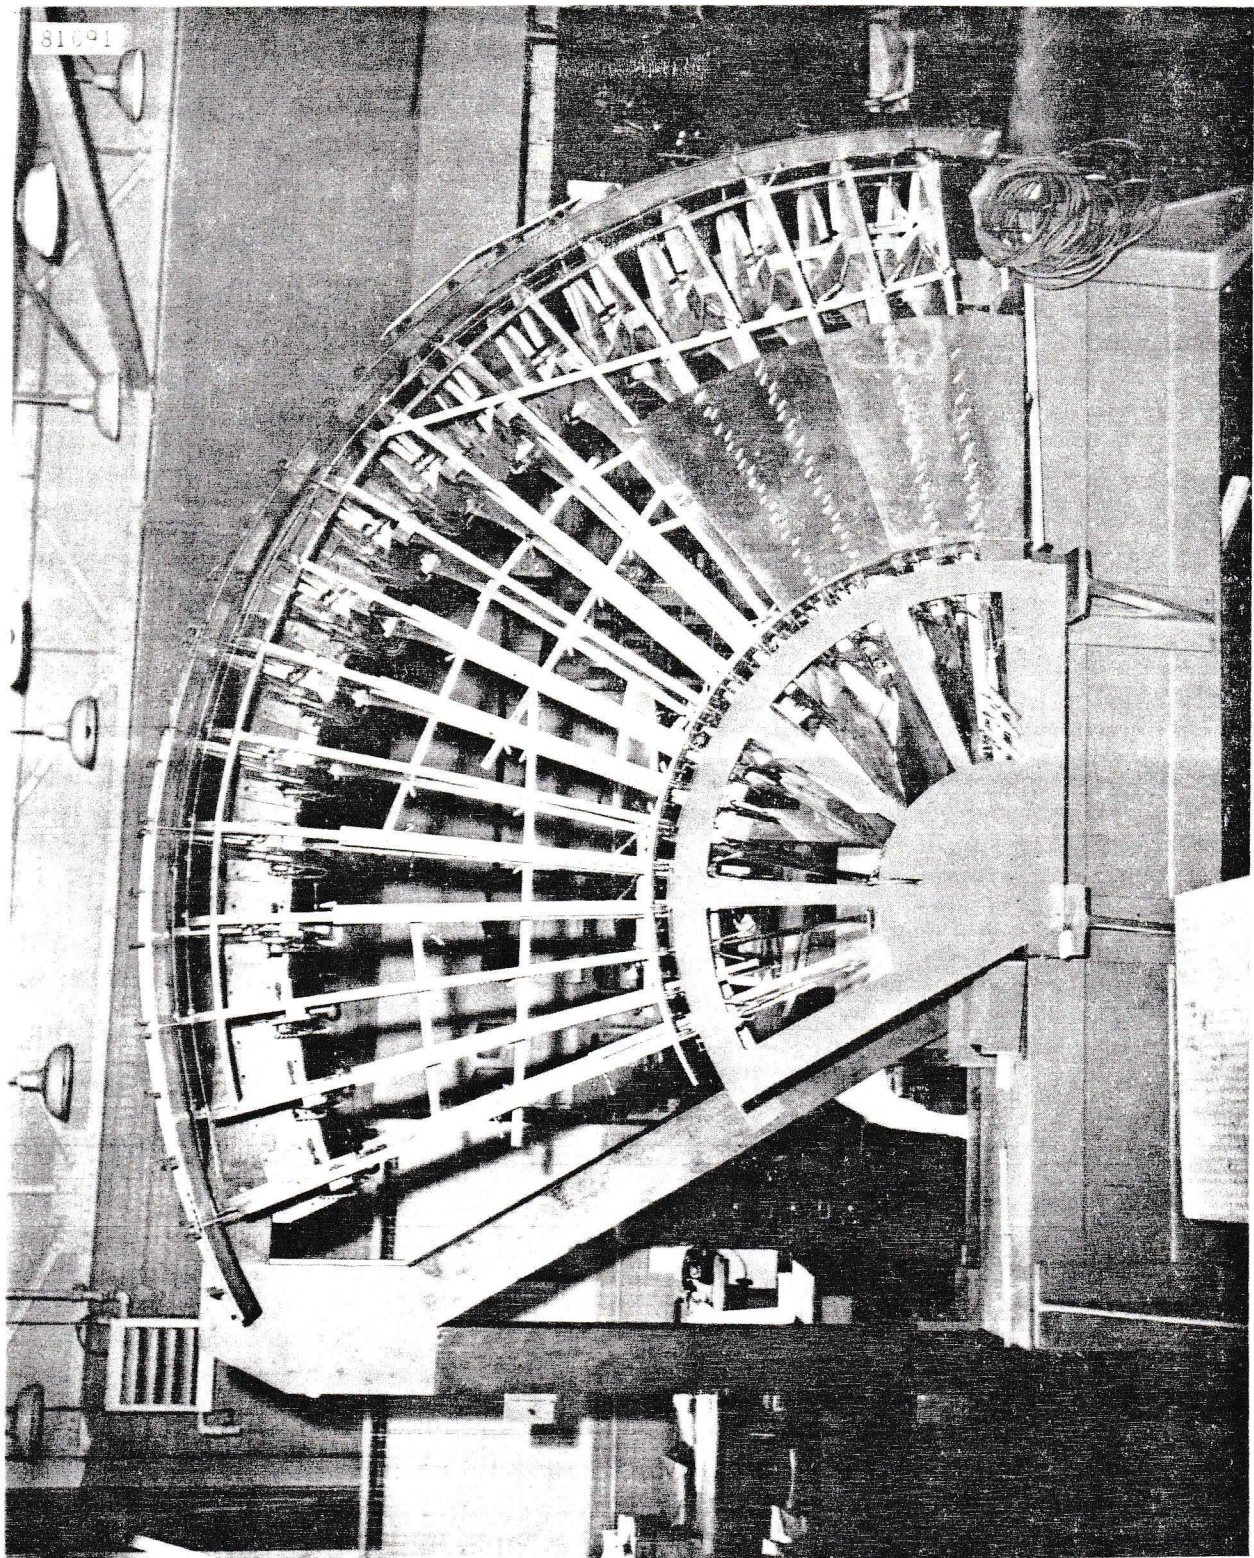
WING SEGMENT IN COURSE OF ASSEMBLY IN JIG
